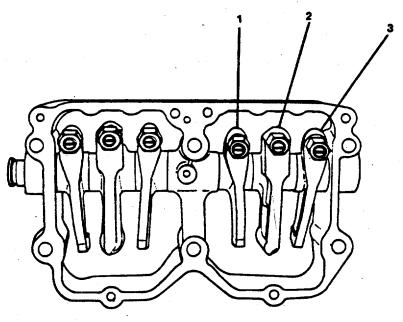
Installing the Arms and Levers on Shaft.
